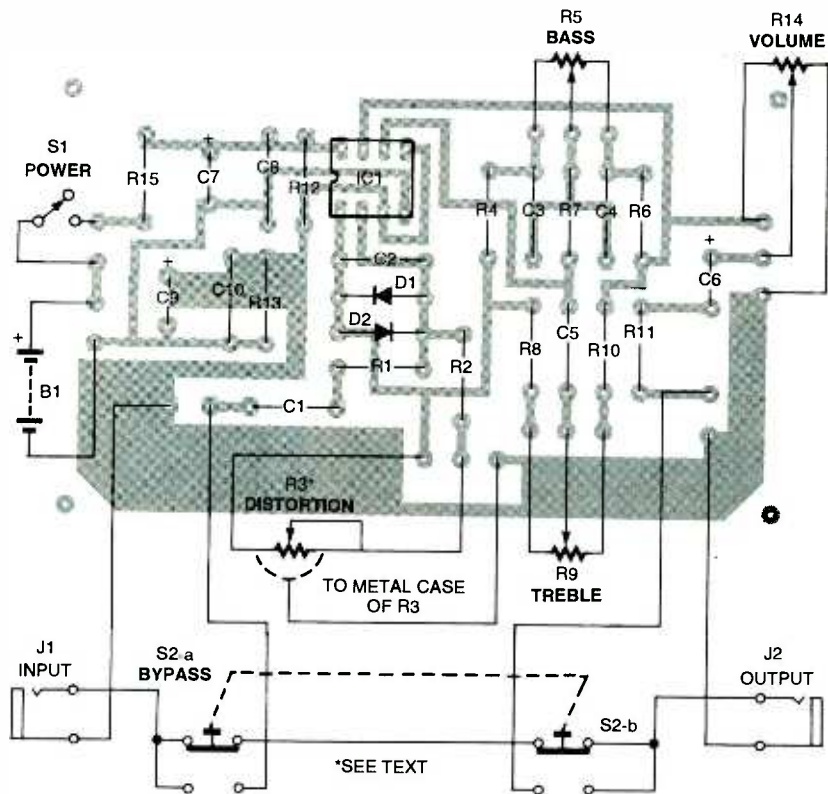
Once you've etched the board and obtained all of the parts listed in the Parts List, assemble the circuit's printed-circuit board guided by this parts-placement diagram. Once the board-mounted components have been soldered in place, do a quick check of the board, looking for and correcting any construction errors (such as misoriented or misplaced components, cold solder joints, solder bridges, etc.) as they are encountered.
